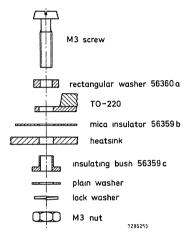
Insulated screw mounting with rectangular washer. Known as a "bottom mounting".
